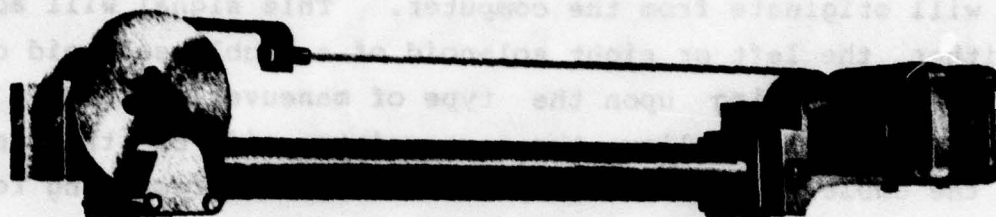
Cable Cylinder with Tensioner and Caliper Disc Brake
